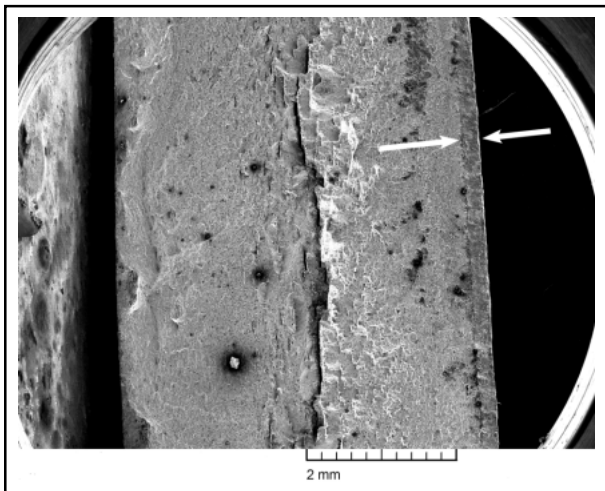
This area of the spring eye half of the fracture clearly shows secondary cracks at the midplane and an old crack (arrows) at the outside surface.
